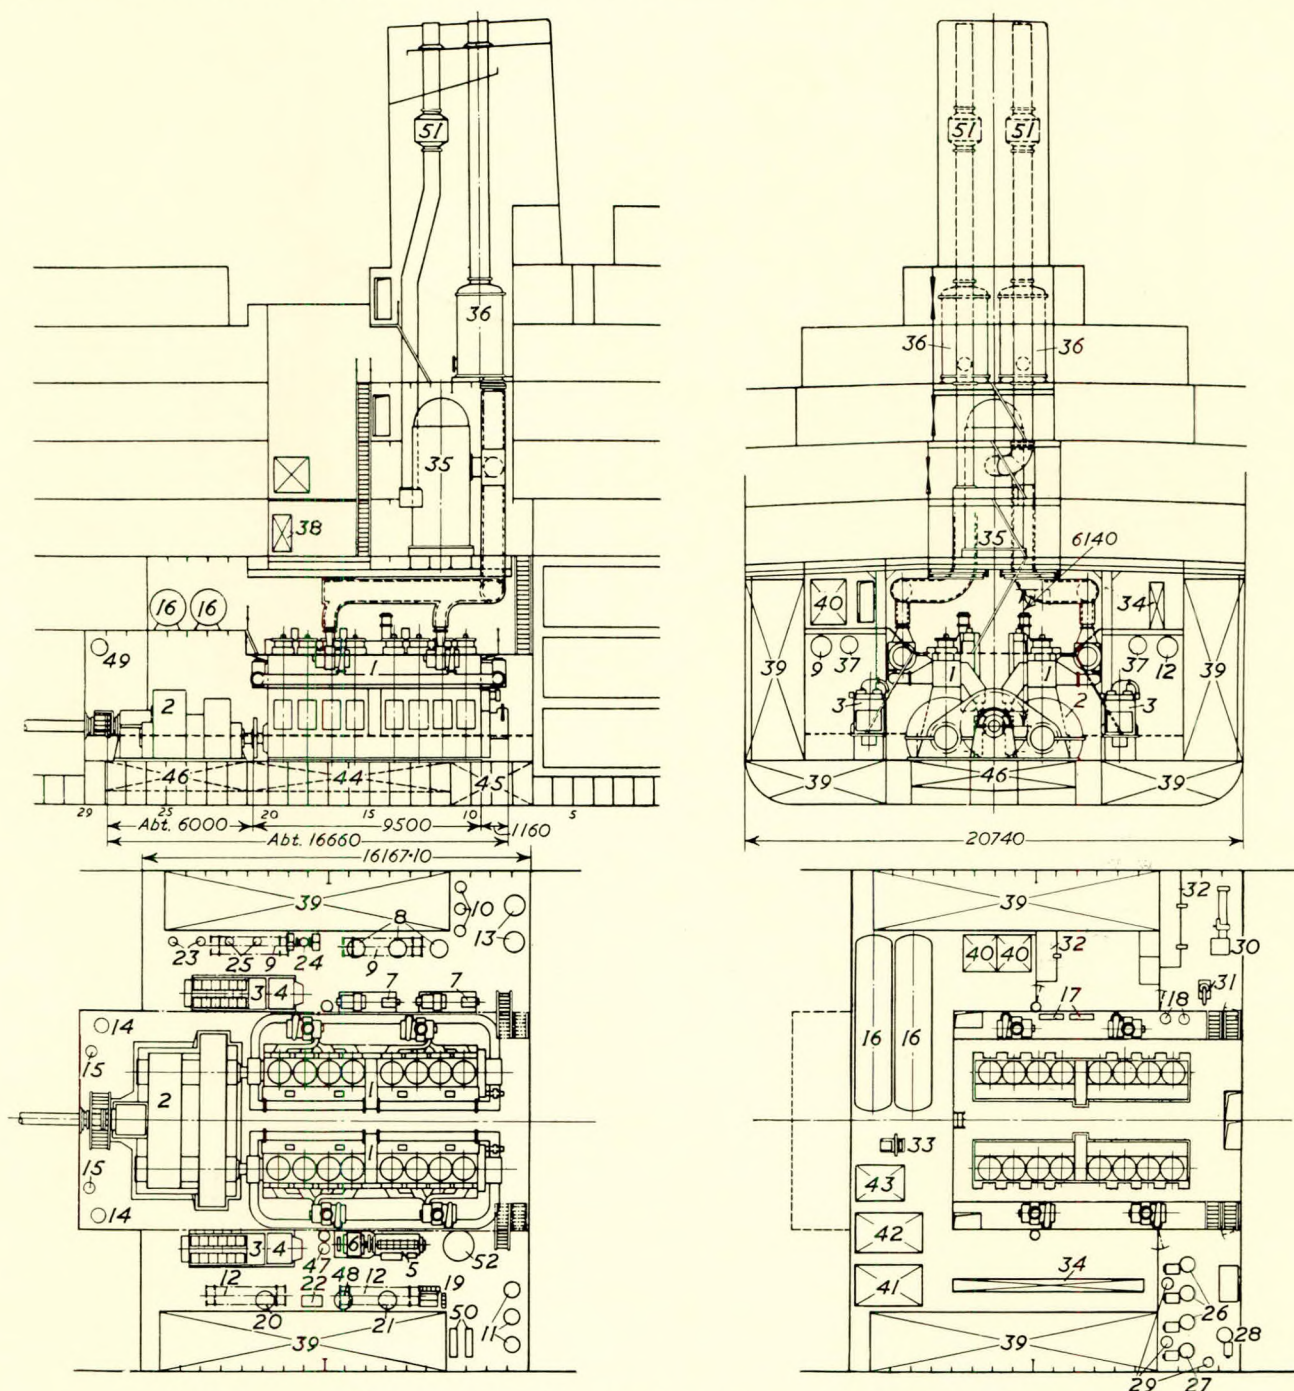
Single-screw geared two-stroke machinery: 10,500 s.h.p., 100 r.p.m.
